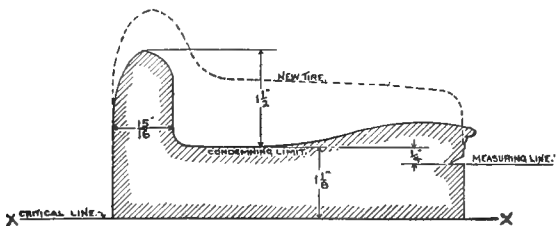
STEEL TIRE, SHRINKAGE FASTENING ONLY.
